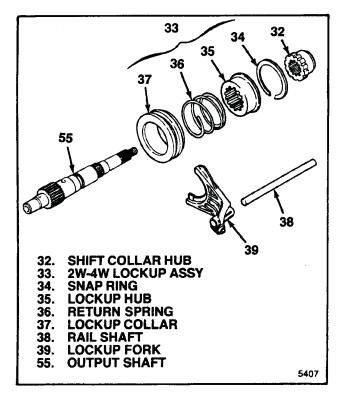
Lockup Shift Parts (Mechanical Shift)
